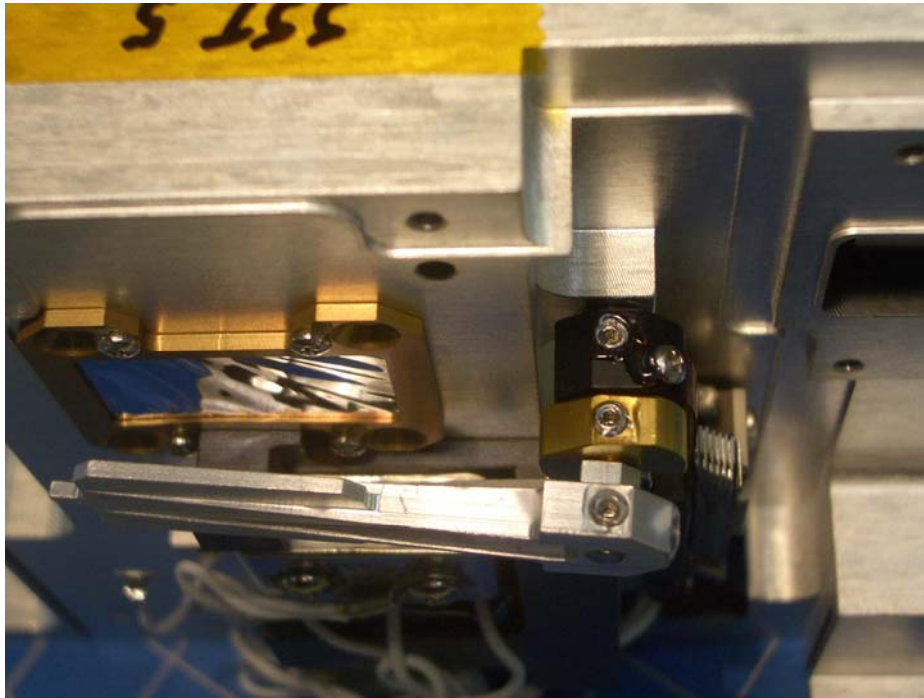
Deformed pivot shaft and outer attenuator (TOP VIEW)
